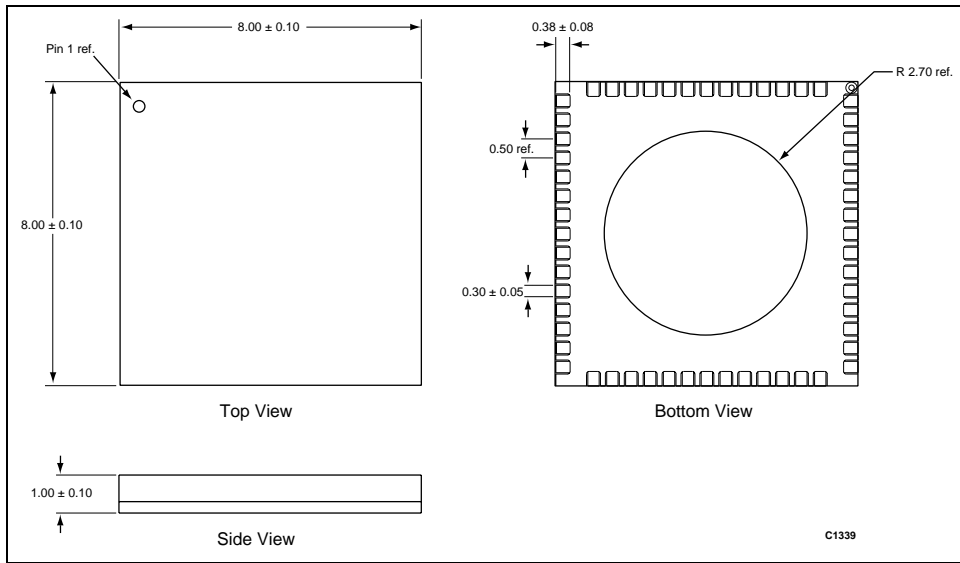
CX74063 56-Pin RFLGA Package Dimension Drawing
